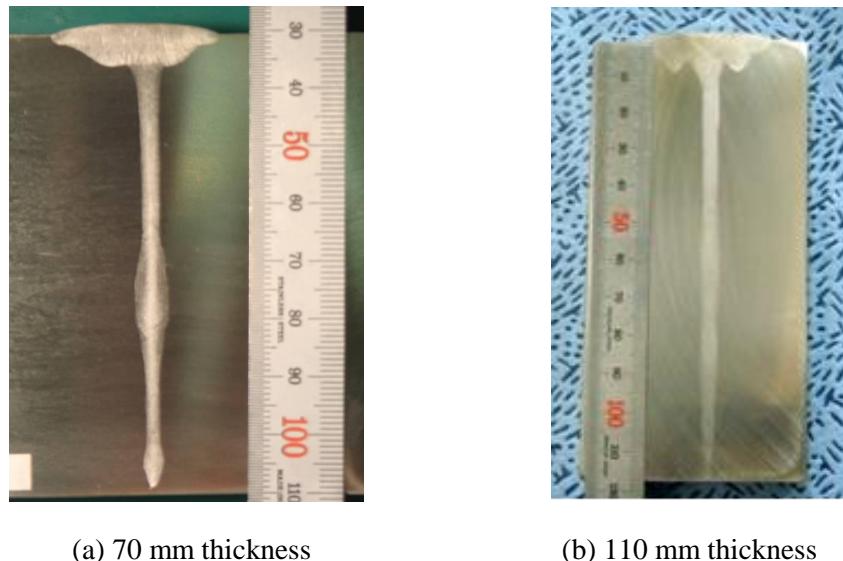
Macroscopic cross section through the fusion and heat affected zones (HAZ) of thick longitudinal weld.
